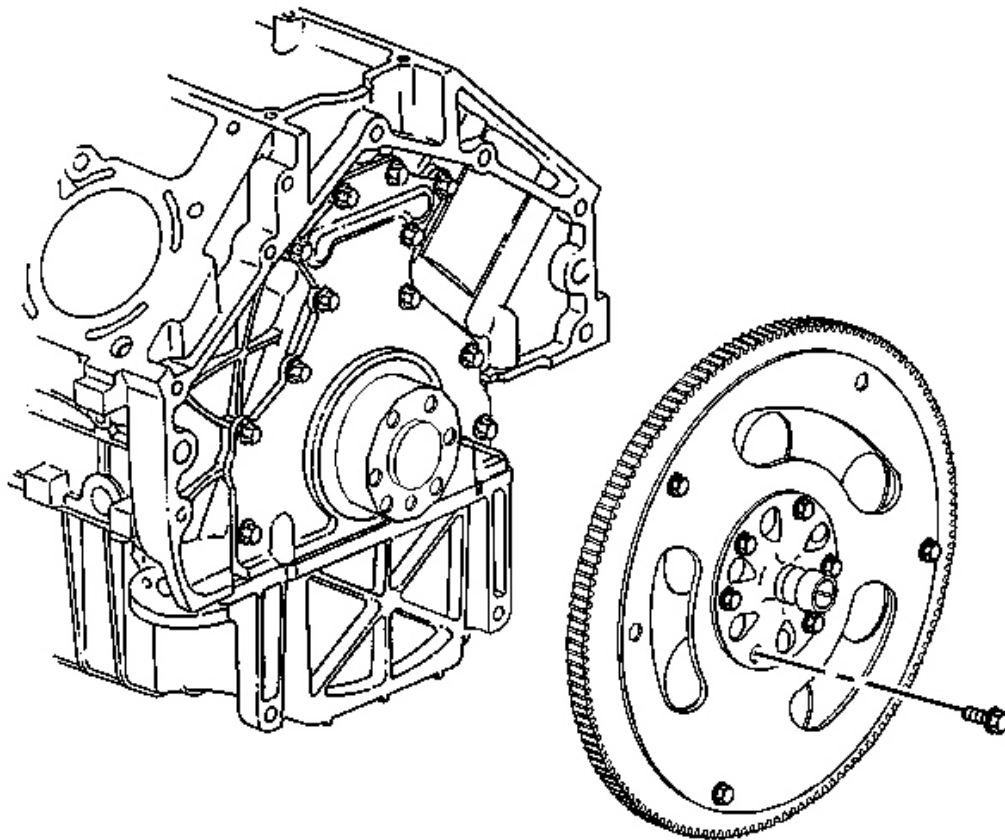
Automatic Transmission Engine Flywheel & Bolts
